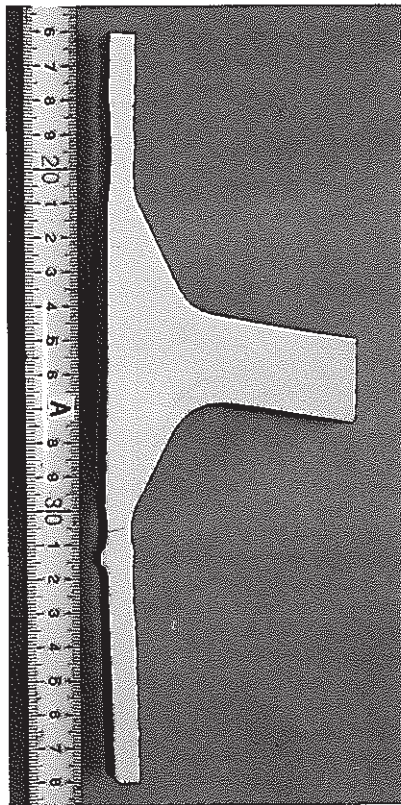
Macroscopic Profiles of Finally Welded Joint
